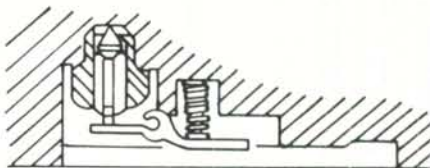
Inlet needle valve lever should be flush with floor of housing recess as shown.
